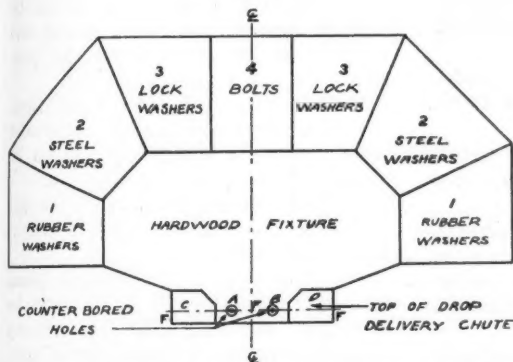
Plan drawing of improved work-arrangement, showing distribution of parts, locating holes for bolts in process, and delivery chute.
